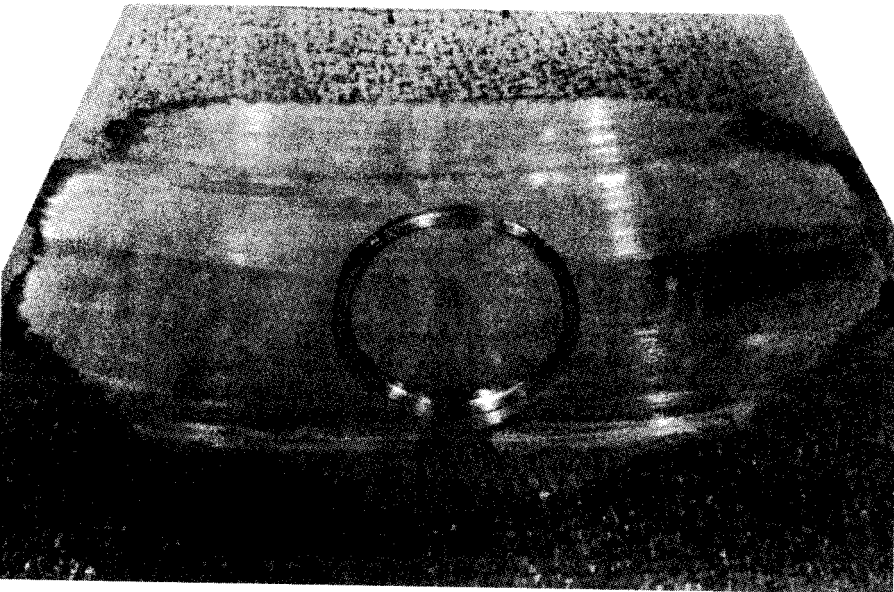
Wipe on large thrust bearing shoe. Courtesy Kingsbury, Inc.
